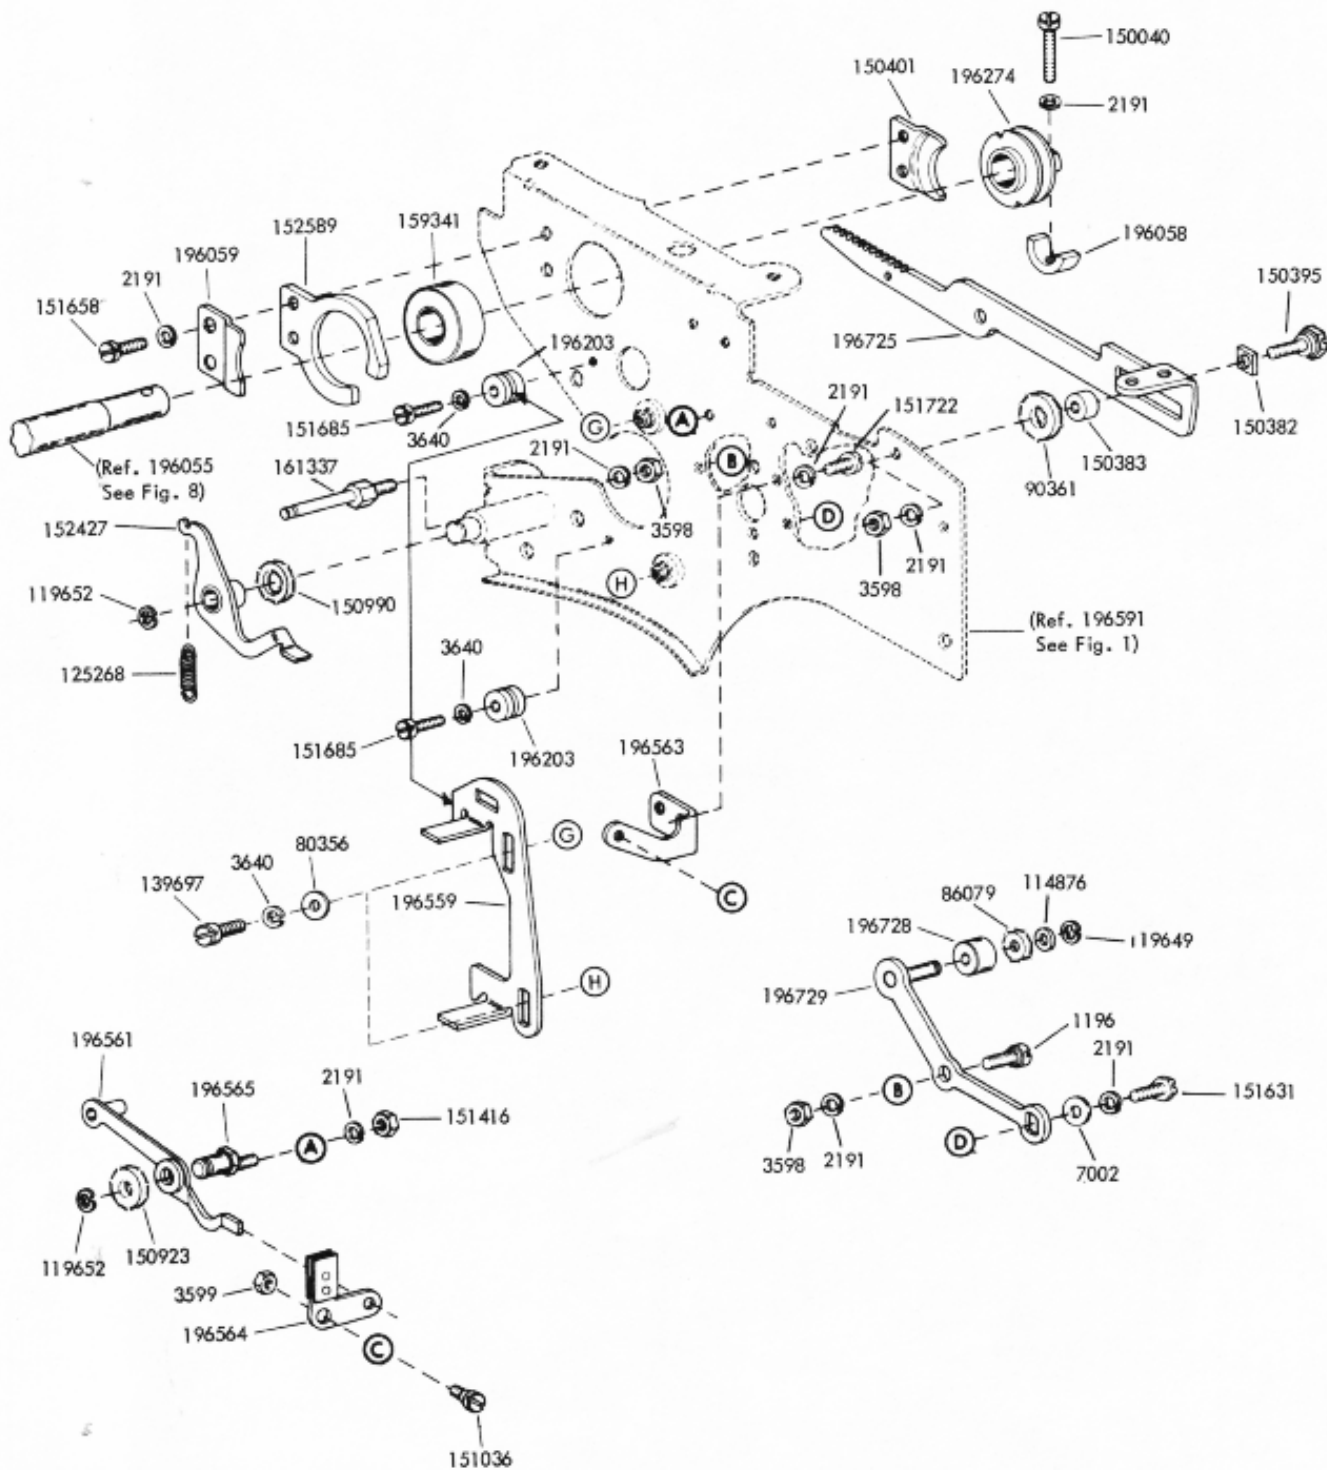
RIGHT FRAME MOUNTING PARTS
